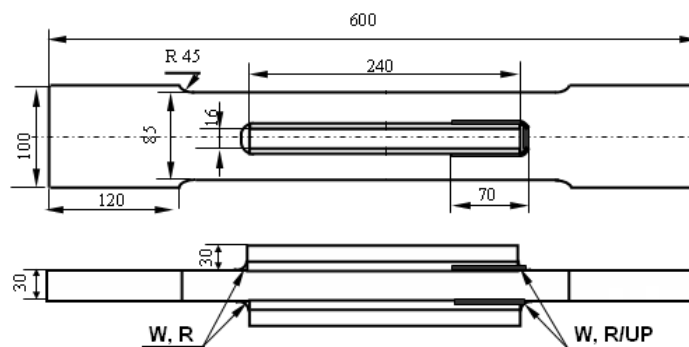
Drawings of welded specimens for fatigue testing at different conditions:
